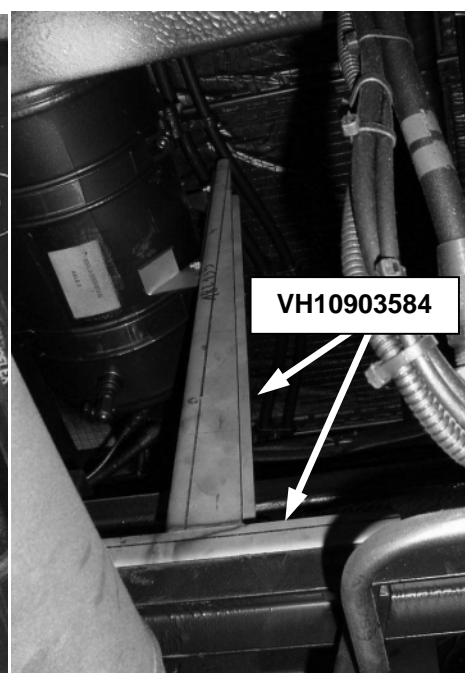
Tank support assembly VH 10903584 for tag axle brake tank
